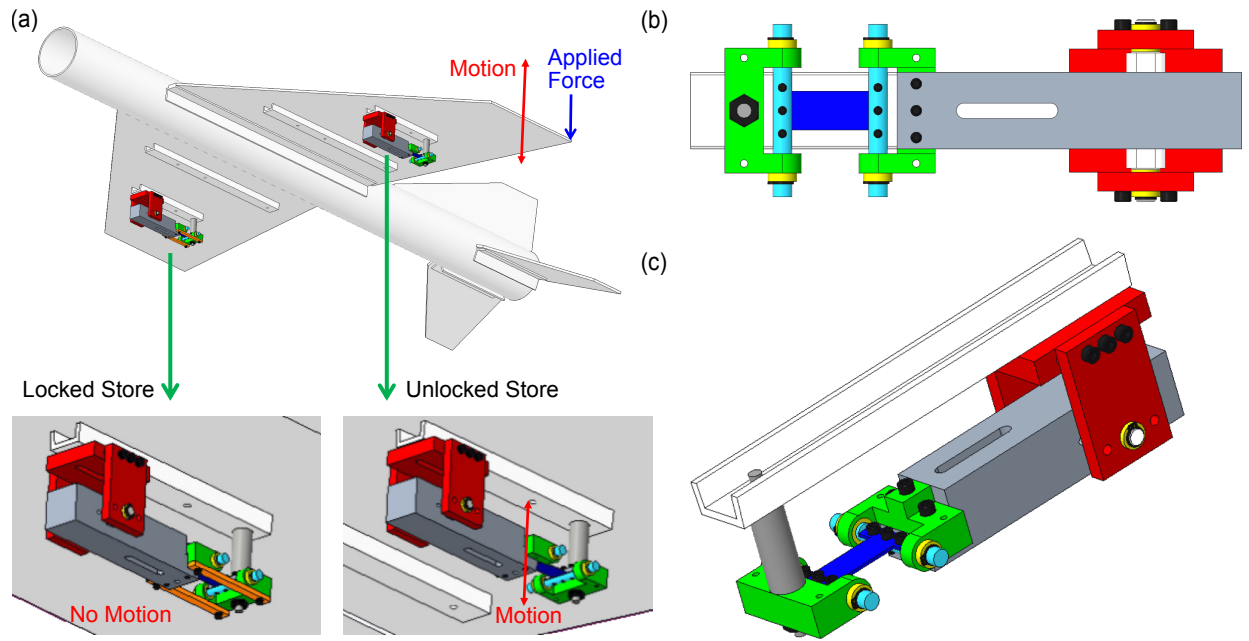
Design of the pinned-pinned flexure: (a) CAD views of model airplane with assembled stores attached and zoomed-in views of the locked and unlocked stores. (b) Bottom view of unlocked store. (c) Isometric view of unlocked store.
